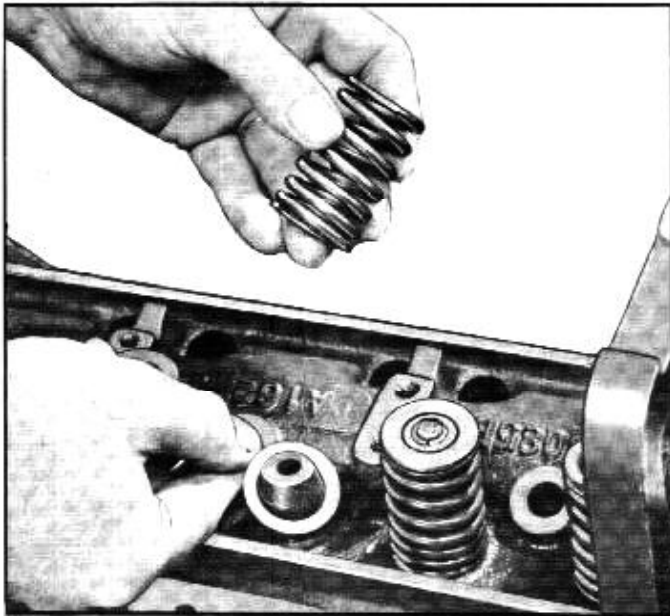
C-69—Adding Spacers to Correct Valve Spring Height
